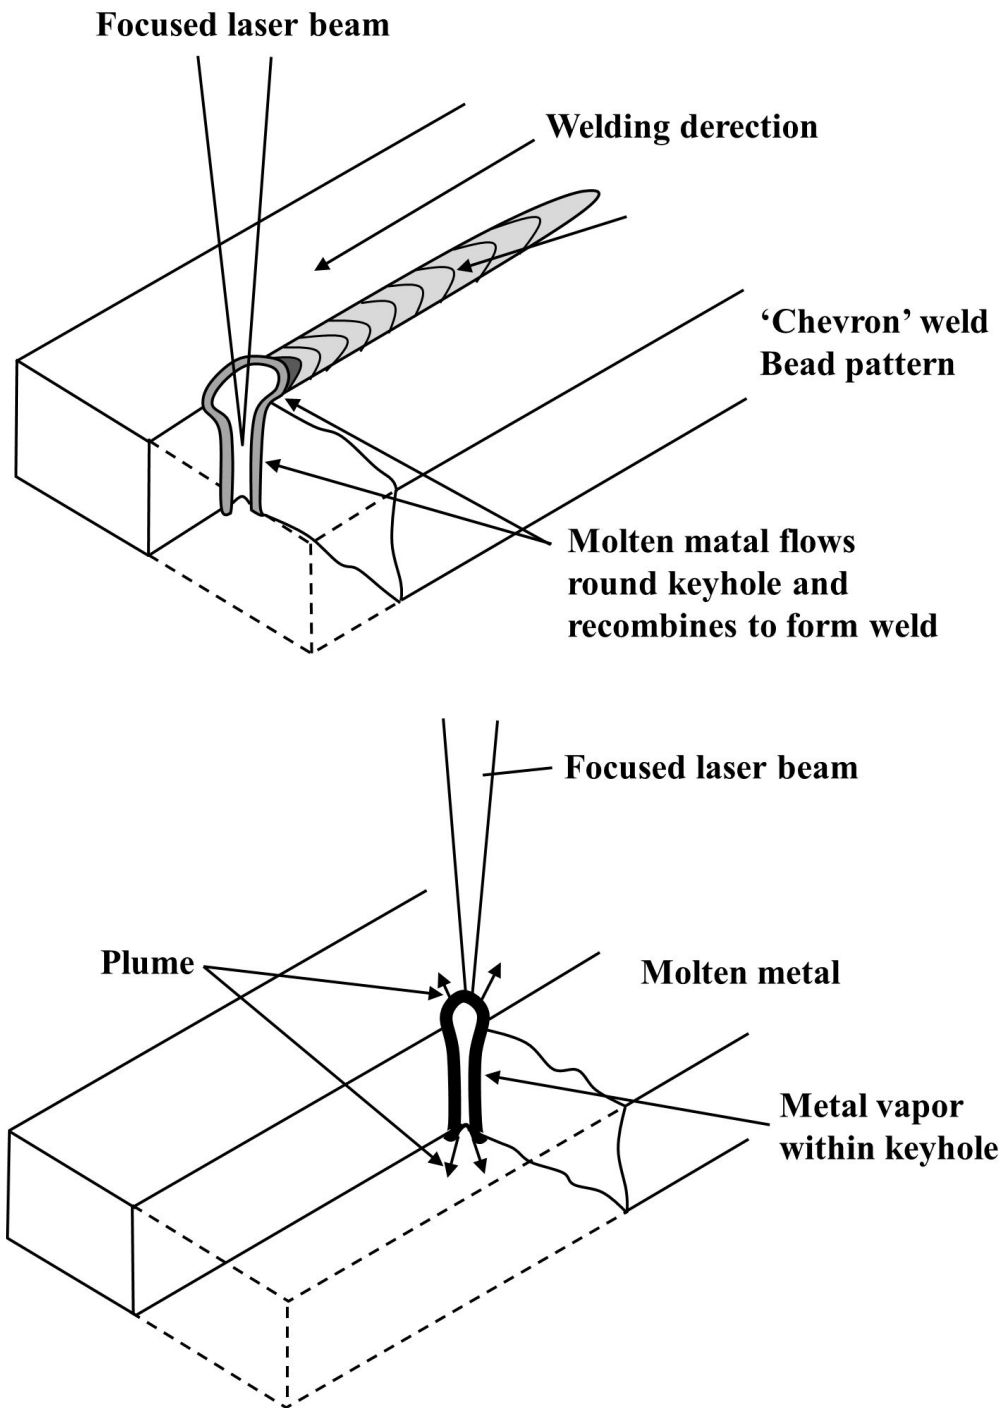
Principle of laser welding and keyhole formation in deep penetration welding[44, 45]
